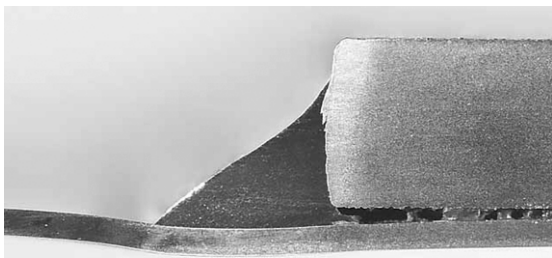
Overlap welding of 0.8 and 4.0mm aluminium sheet by CMT
